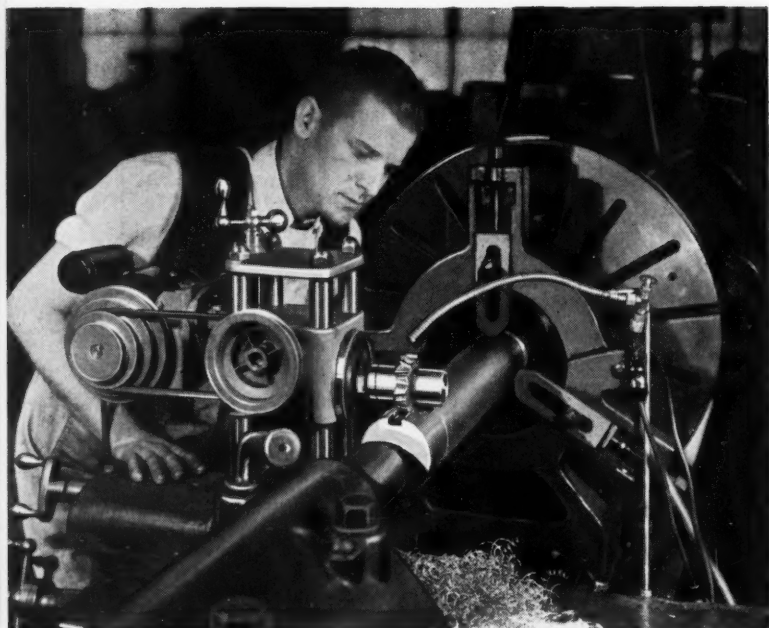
Milling a Keyway, 3/4 Inch Wide by 3/8 Inch Deep, in a Cold-rolled Steel Shaft with a Feed of 1 Inch per Minute
